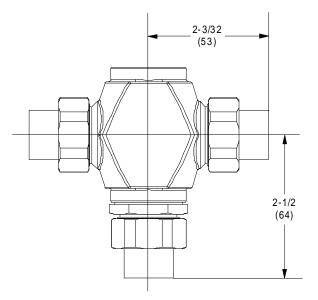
1/2 in. Three-Way Mixing Union Sweat VG7000 Series Bronze Control Valve Dimensions, in. (mm)
